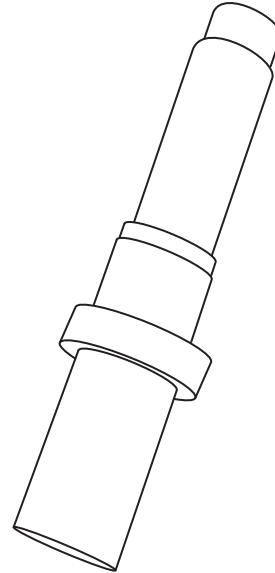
Needle Bush Pressing Tool (332/Y4026)
